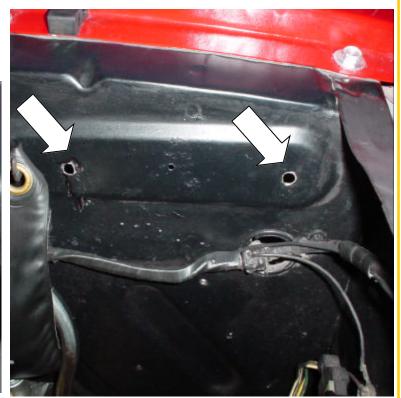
Remote reservoir mounting holes drilled. Look for factory dimples as hole guide.
